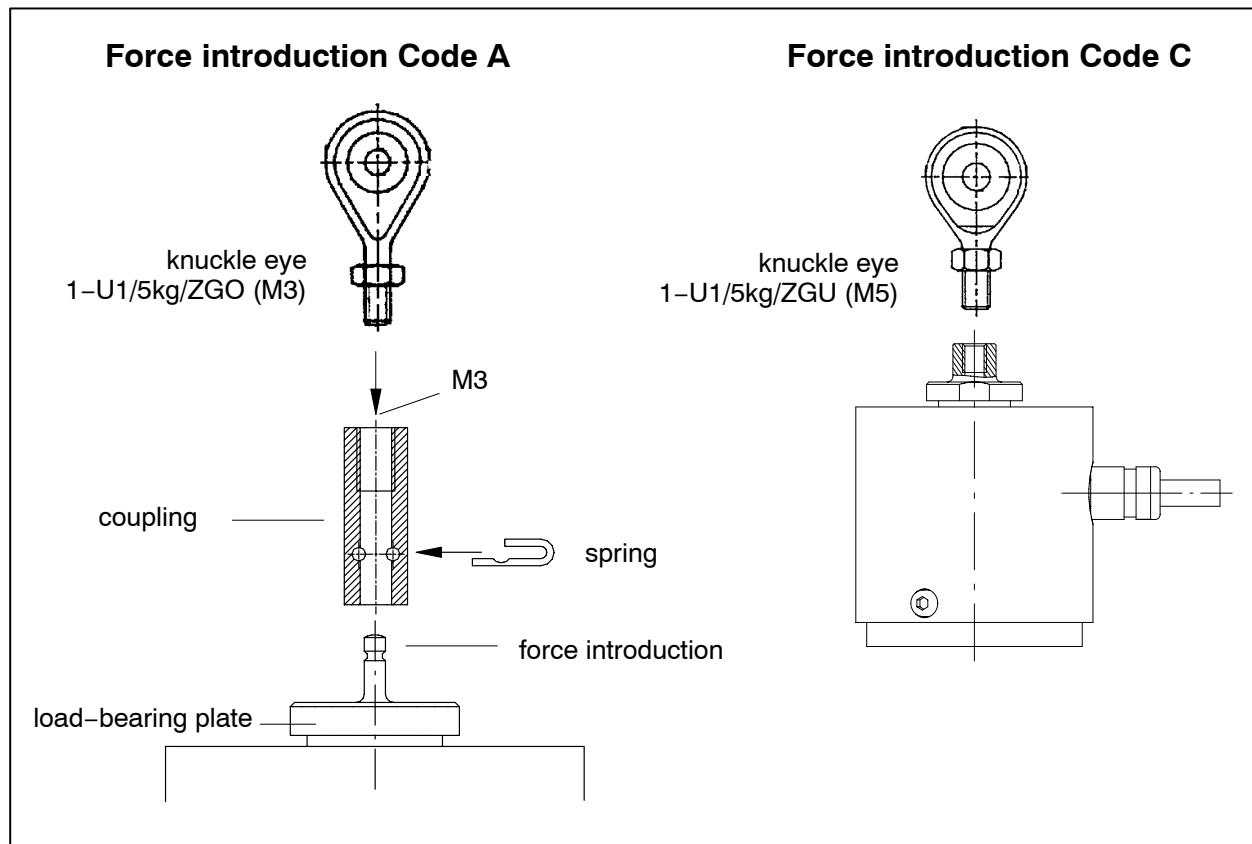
Mounting with coupling and knuckle eye ZGO
